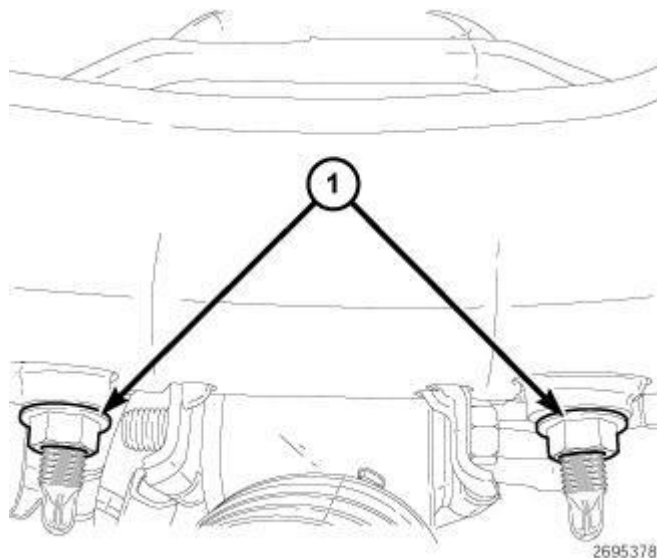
LEFT UPPER ENGINE MOUNT RETAINING BOLTS
